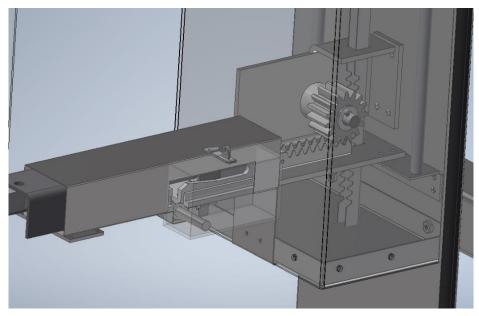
Connection between Locking Mechanism and Gear Mechanism
